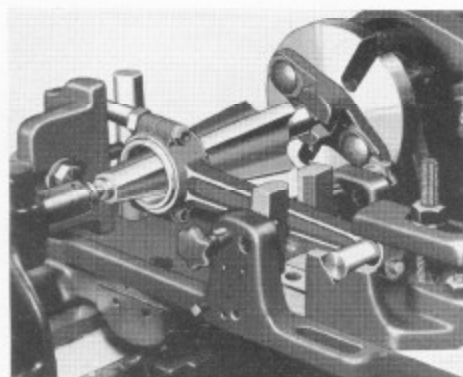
Aligning connecting rod bearing with centering cone between centers.
